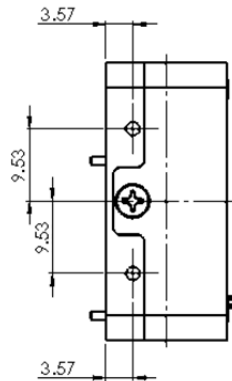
2-56” Mounting Holes Location on Side of NOCTURN XS Camera (all dimensions are in mm)
